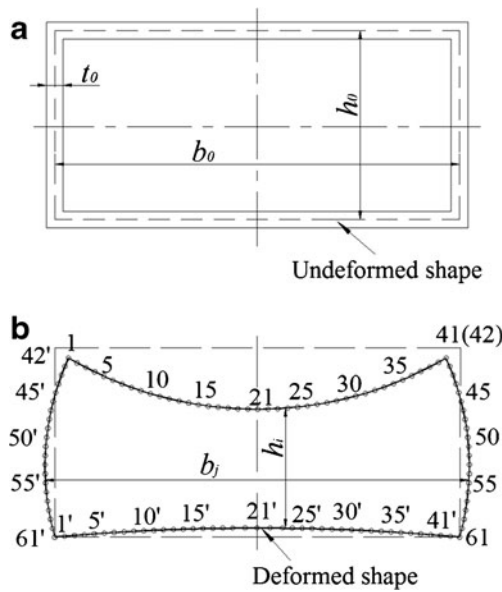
Geometric parameters of the cross-section: a undeformed and b deformed
